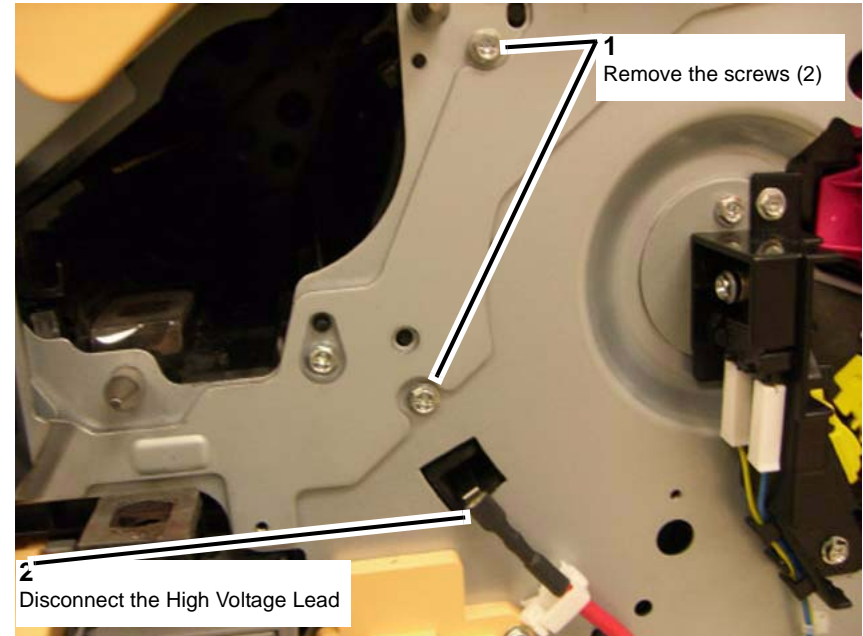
Removing the screws (2) and disconnecting the High Voltage Lead
